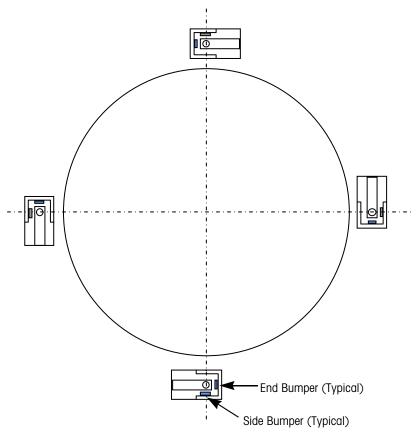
Plan View of Circular Mounting Arrangement for Model 0958 CENTERLIGN Modules
